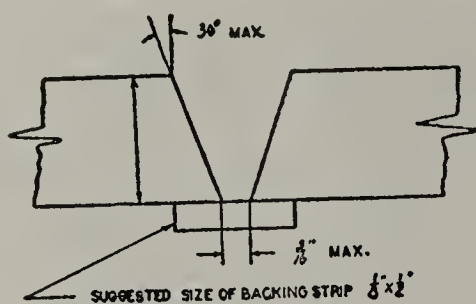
(a)—Butt Joint for Plate $\frac{3}{8}$ In. Thick
